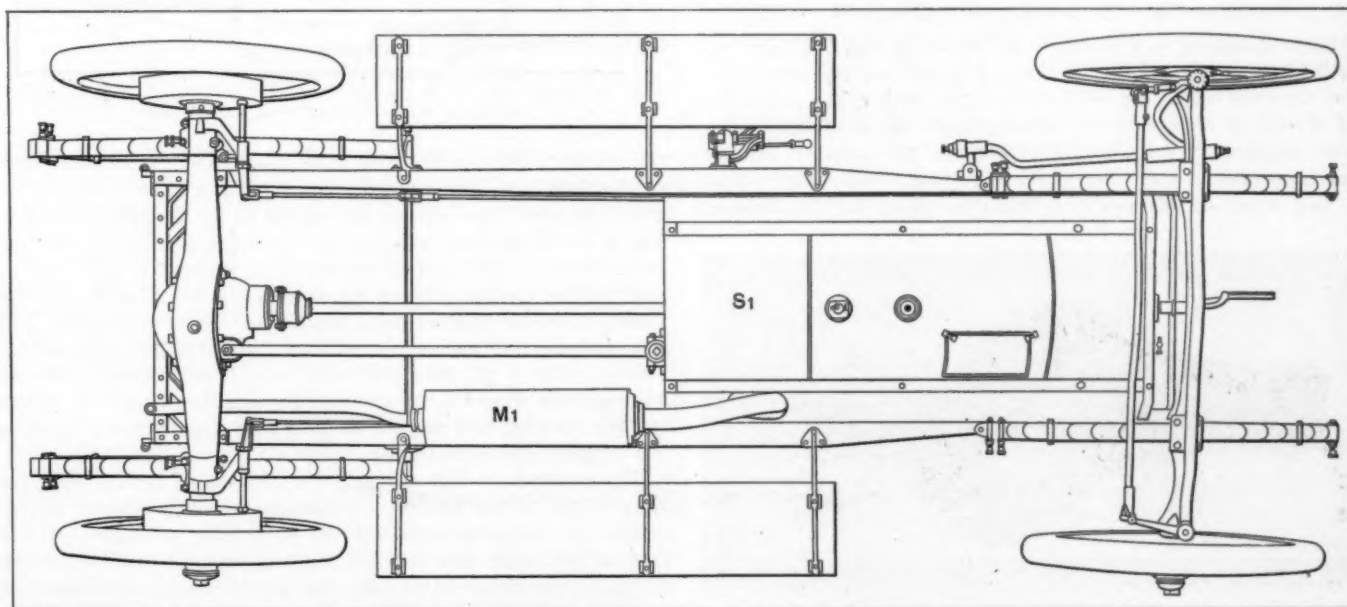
Bottom view of the Model "30" chassis, showing freedom from inaccessible parts and a protective sod apron
